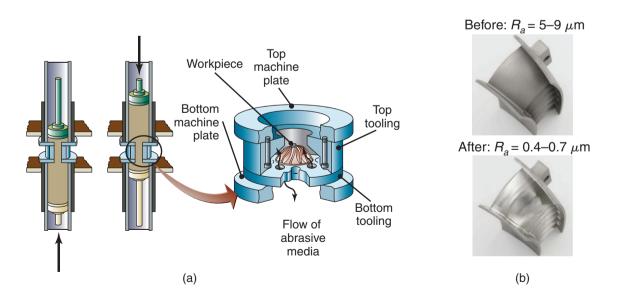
(a) Schematic illustration of abrasive-flow machining to deburr a turbine impeller. The arrows indicate movement of the abrasive media. Note the special fixture, which is usually different for each part design. (b) Valve fittings subjected to abrasive-flow machining to eliminate burrs and improve surface quality. *Source:* Courtesy of Kennametal Extrude Hone.
